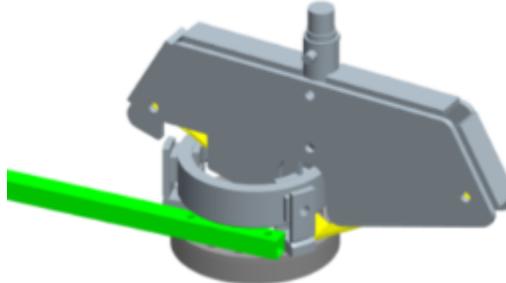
CAD model of edge radius fixture installed on turn-table with attached rotating bar and riser fixture.
